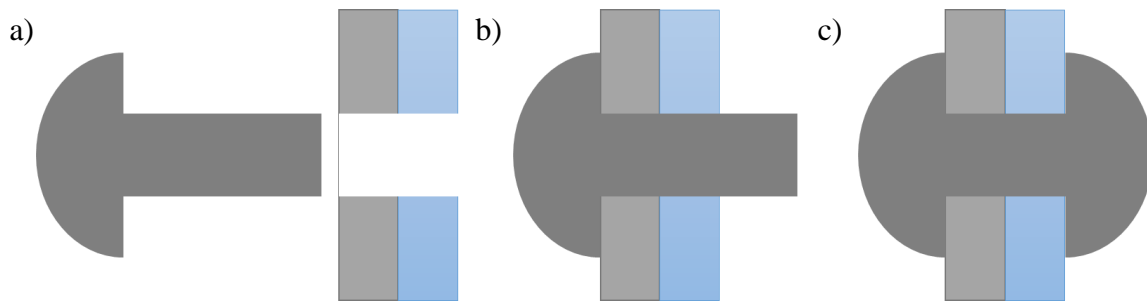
Cross section schematic representation of the riveting process: a) shows a solid rivet with a pre-drilled sheets that will be joined; b) the rivet goes in the hole; c) the rivet is hammered to form the mechanical lock.
